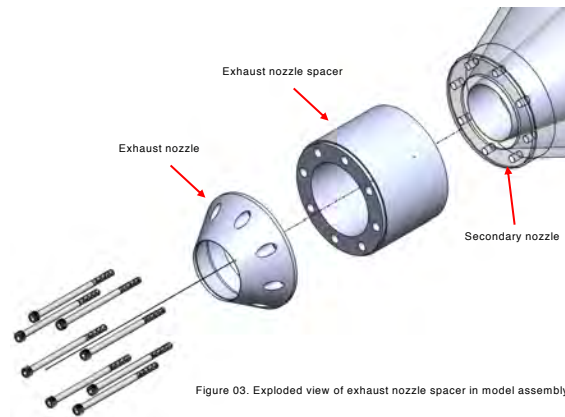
Exploded view of exhaust nozzle spacer in model assembly
